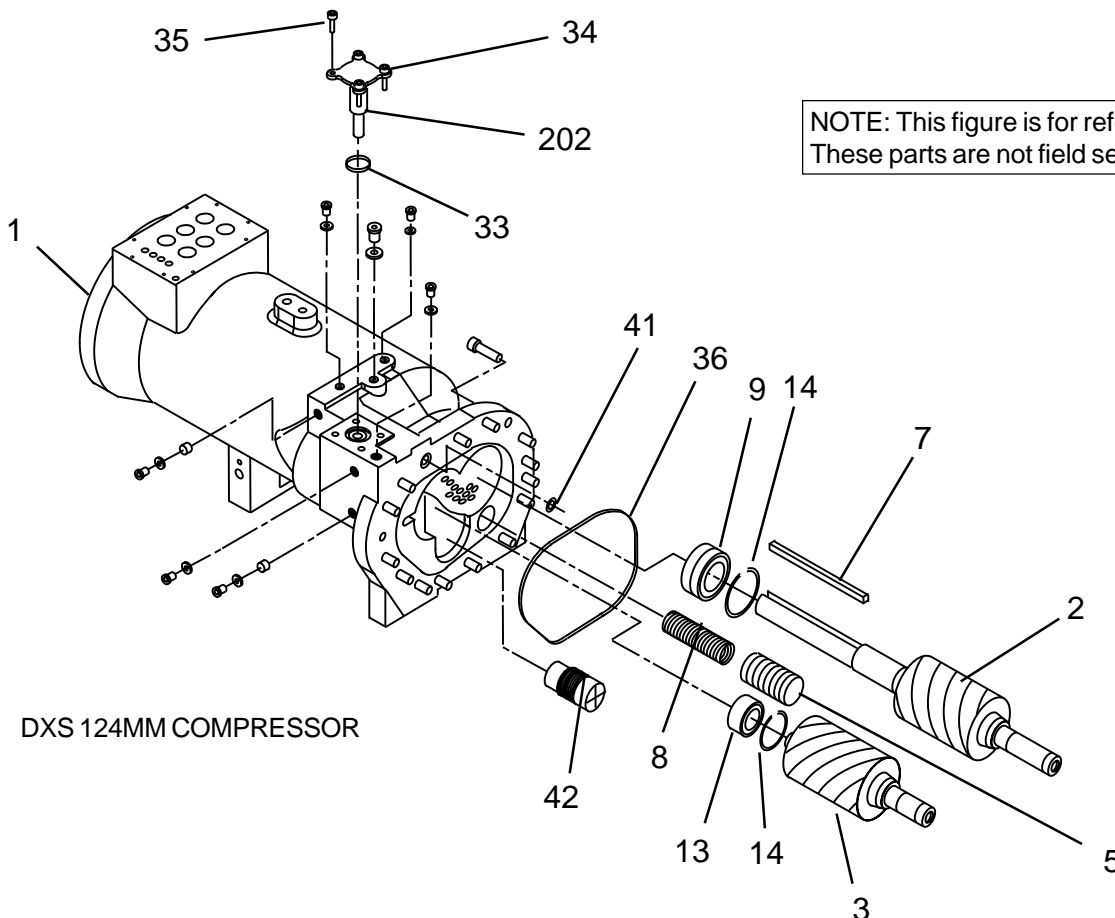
COMPRESSOR PARTIAL EXPLODED VIEW (REF. TABLE 10)
